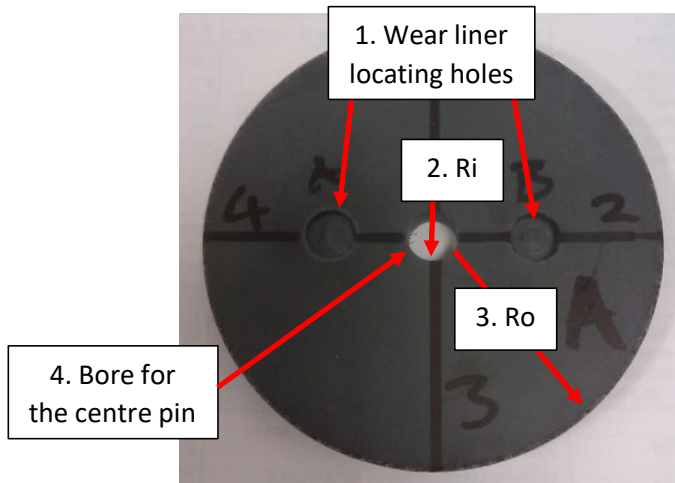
Locating holes on the back-face of the wear liner samples.
